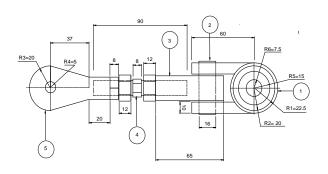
Crank of the cutting device before development (1) Yoke crank (2) Pin yoke (3) Joint rod (4) Lock nut (5) Ball thl
